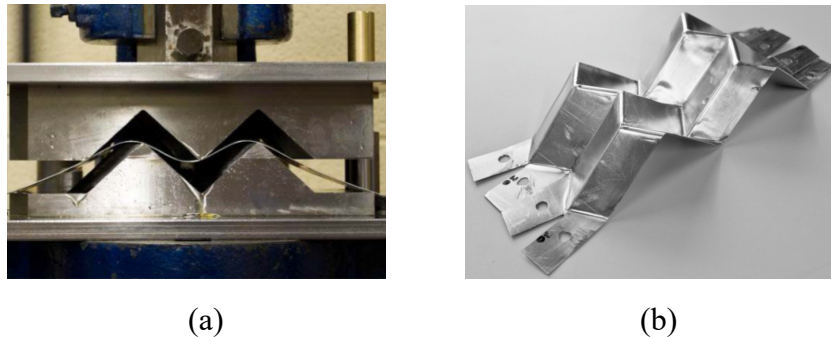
Stamping technique: (a) Stamping process; (b) stamped specimen.
